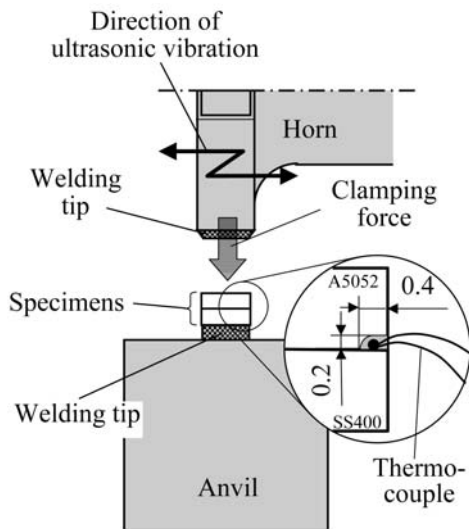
Schematic illustration of the apparatus for ultrasonic welding. Enlarged part of the specimens shows the location of a thermocouple to measure the interface temperature.
